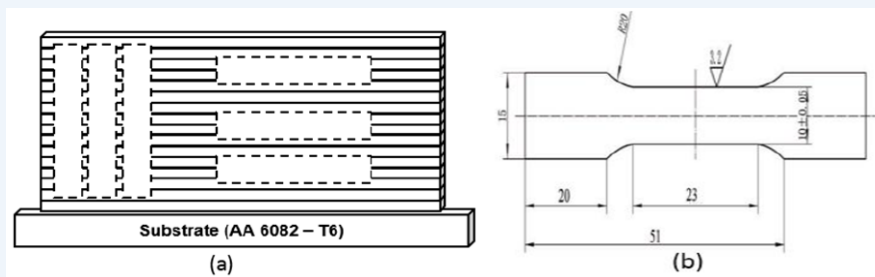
(a) Sectioned directions of tensile specimens and (b) tensile specimen dimensions
